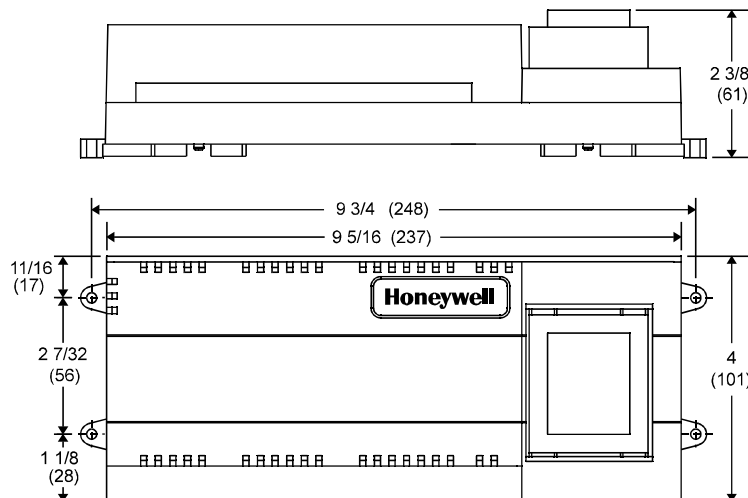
Excel 10 Fan Coil Unit Controller outside and mounting dimensions in in. (mm).
